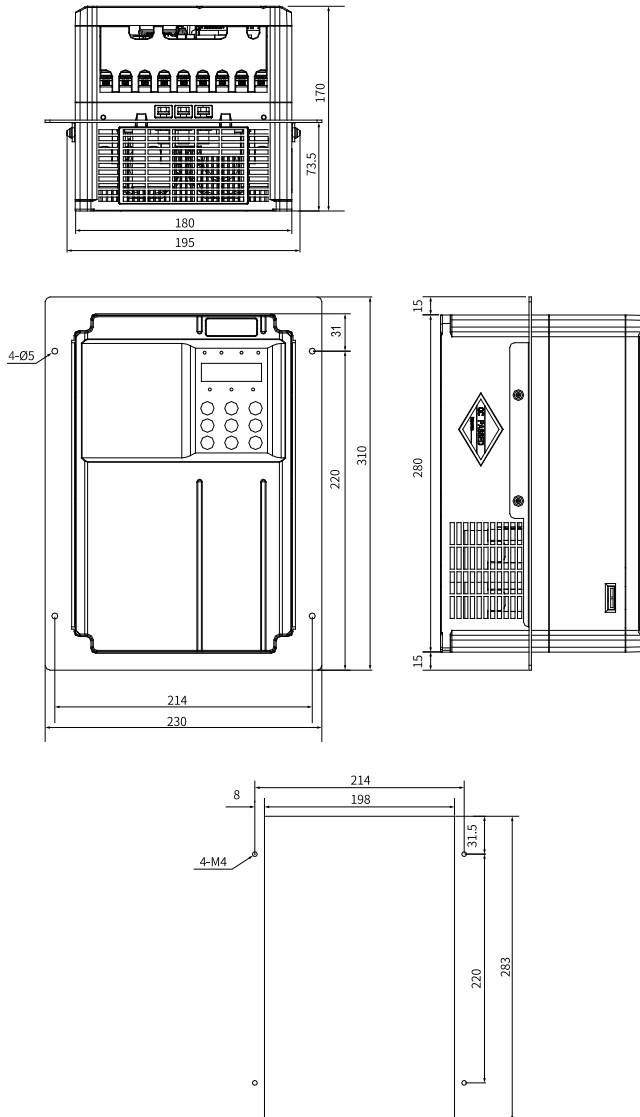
Dimensions of the MD500-AZJ-A1T4 bracket and mounting hole
